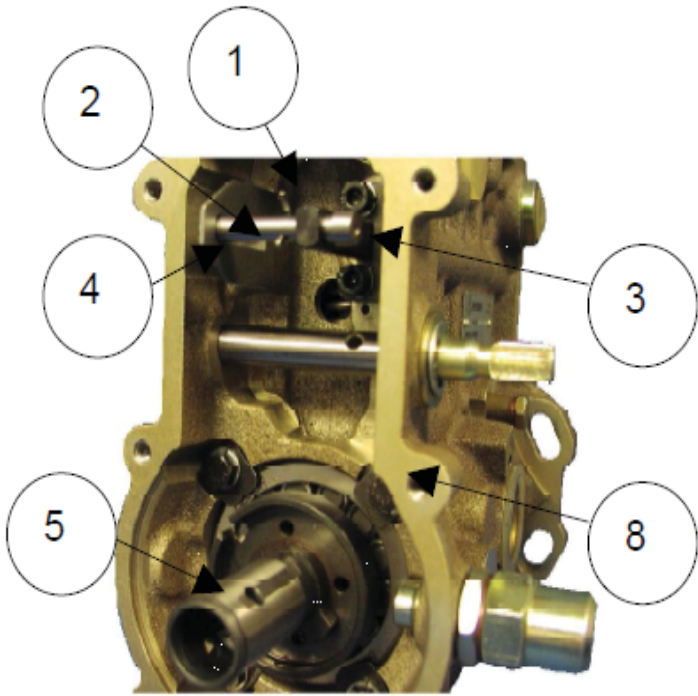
MOTORPAL Pump w/out Housing or Mechanical Governor.
